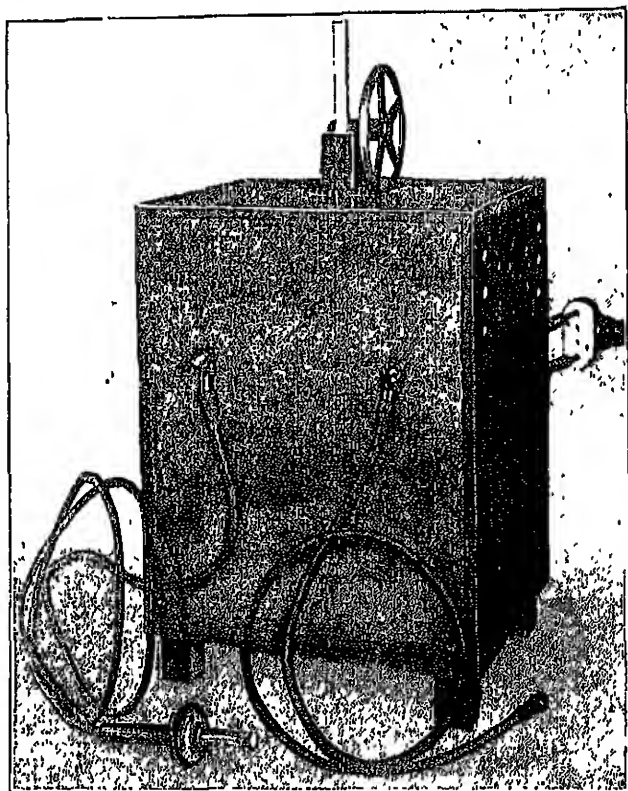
Zeus Arc-Welding Outfit.
